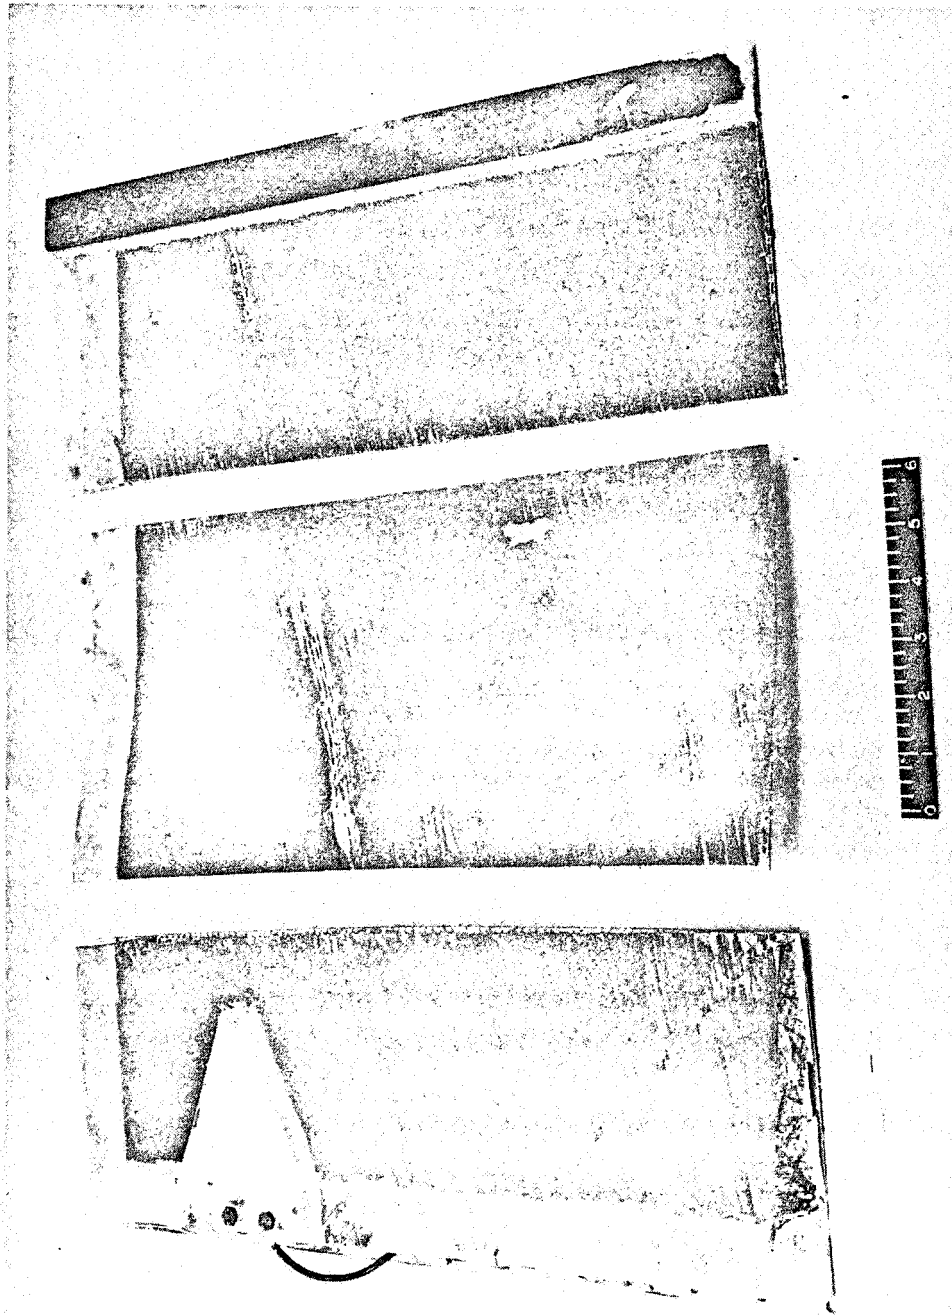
CHEM-MILLED SECTIONS OF -3 TEST SPOILER
